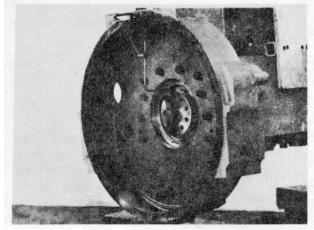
N-43. Use the Indicator to Check the Flywheel Housing Face
